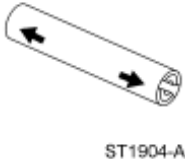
Identifying Special Tools (303-300, 303-350, 303-472)
